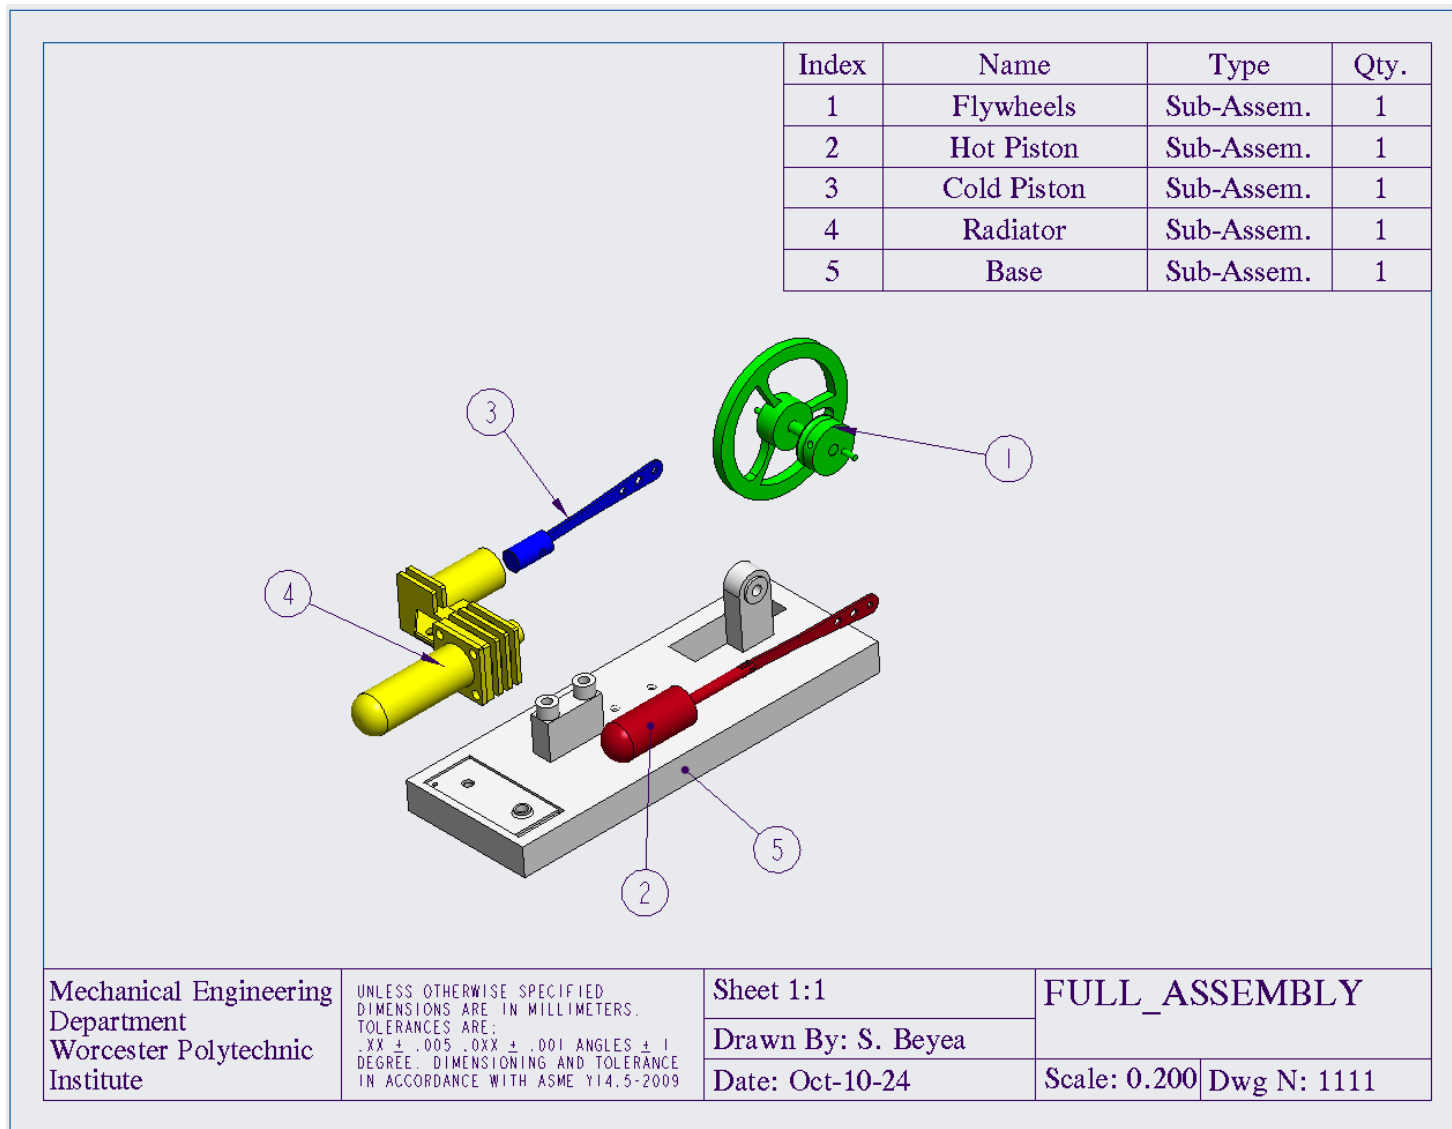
exploded view of full assembly sterling engine(with balloons and BOM)
